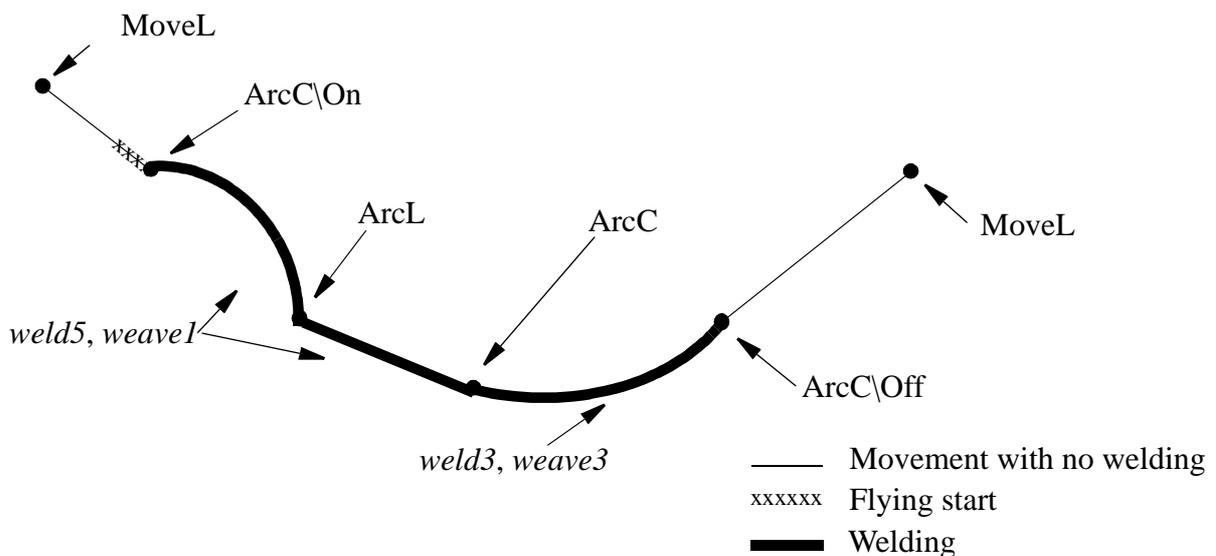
The direction and weld data can be changed by programming several arc welding instructions.
